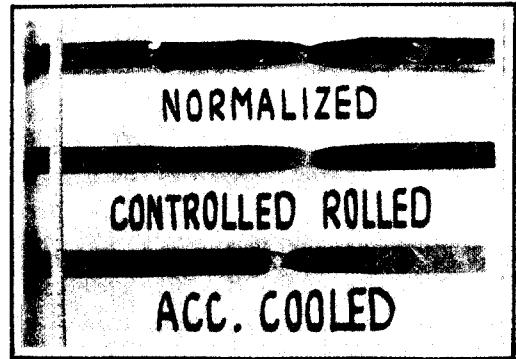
Fractured tensile test specimens. Note that the black marks on the center of each specimen indicate weld metal.
